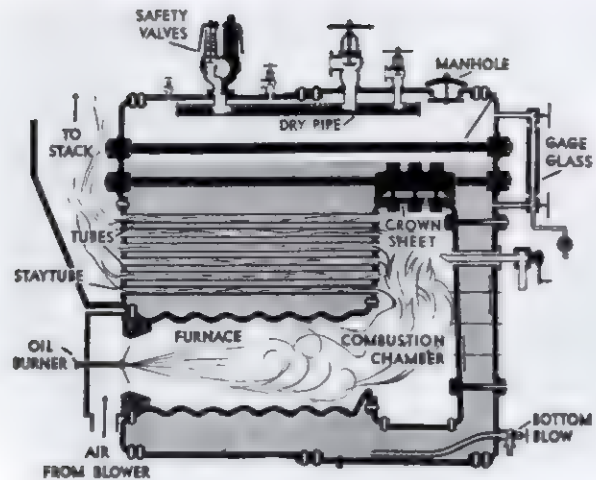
Side view of a Scotch fire tube boiler — hot gas passes through tubes in the water-filled boiler.
